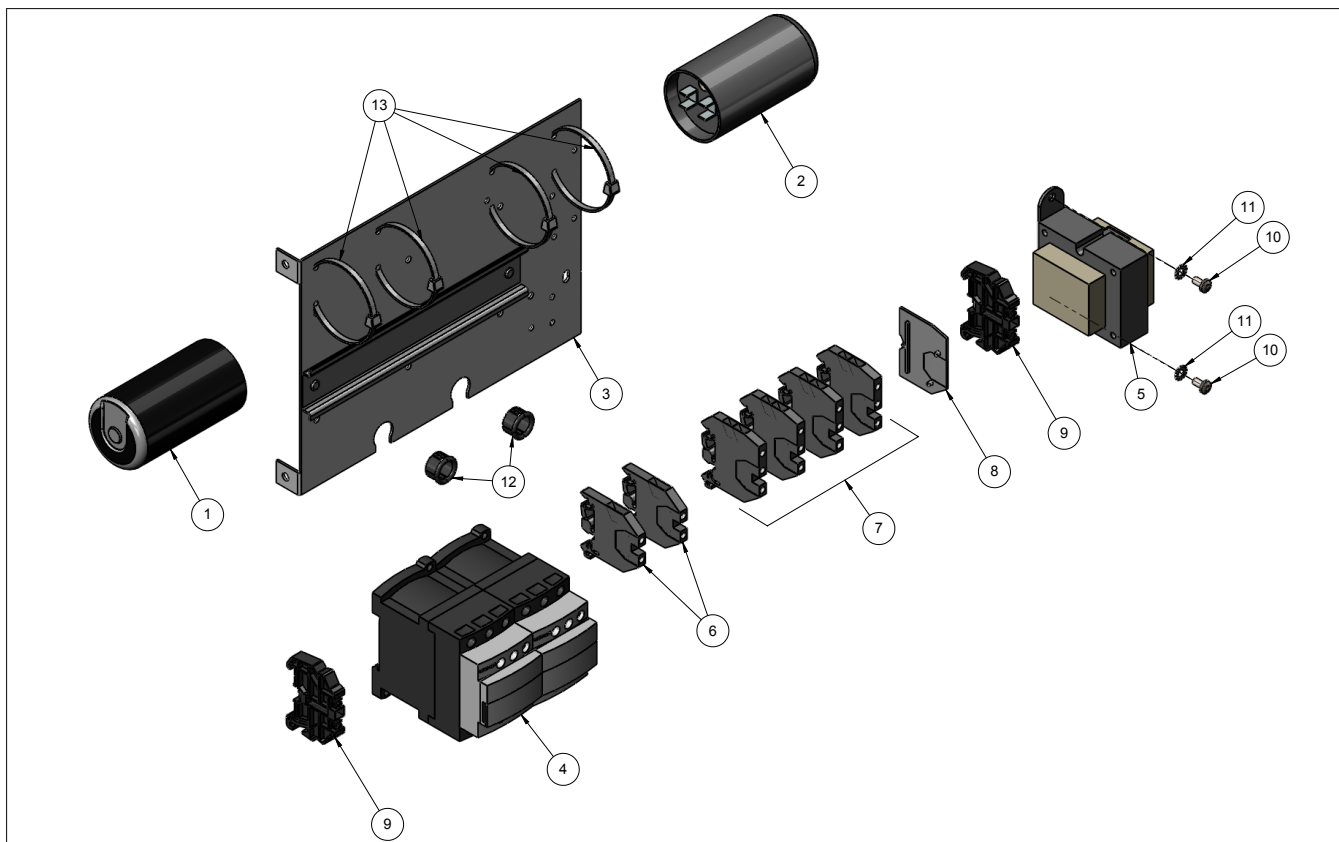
A PARTS LIST FOR ELECTRICAL PARTS FOR 115/230V - 1-PHASE MODELS
